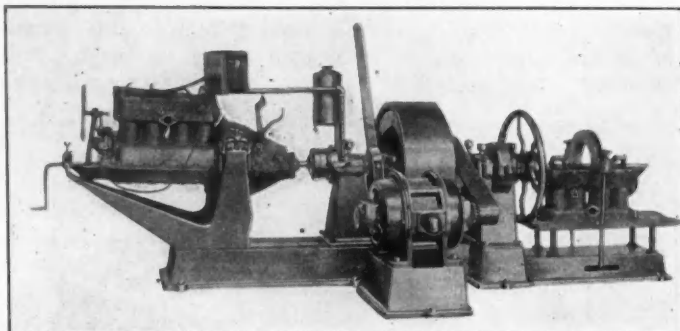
STAND FOR RUNNING-IN NEW ENGINE BEARINGS
